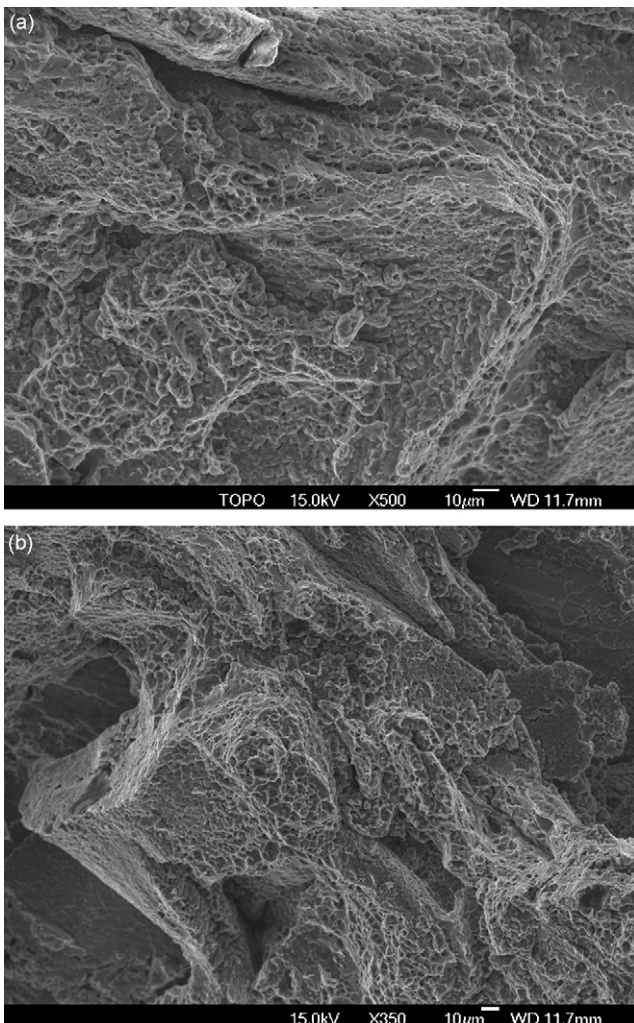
Fracture surfaces of the fatigue specimens (welding speed of 115 mm/min) tested at 85 MPa (a) and 80 MPa (b).
